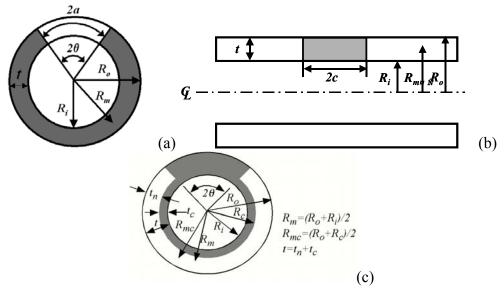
Schematic illustration of (a) circumferential through-wall crack, (b) axial through-wall crack and (c) complex crack.
